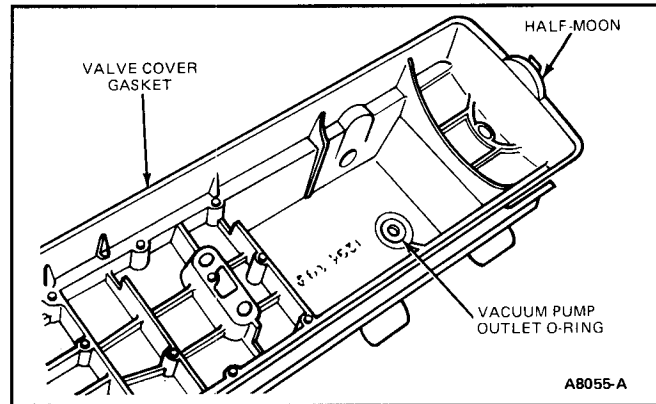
Valve Cover Gasket and Vacuum Pump O-Ring
